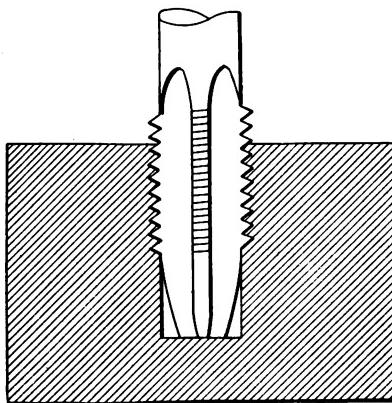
A taper tap will not cut threads to the bottom of the hole
